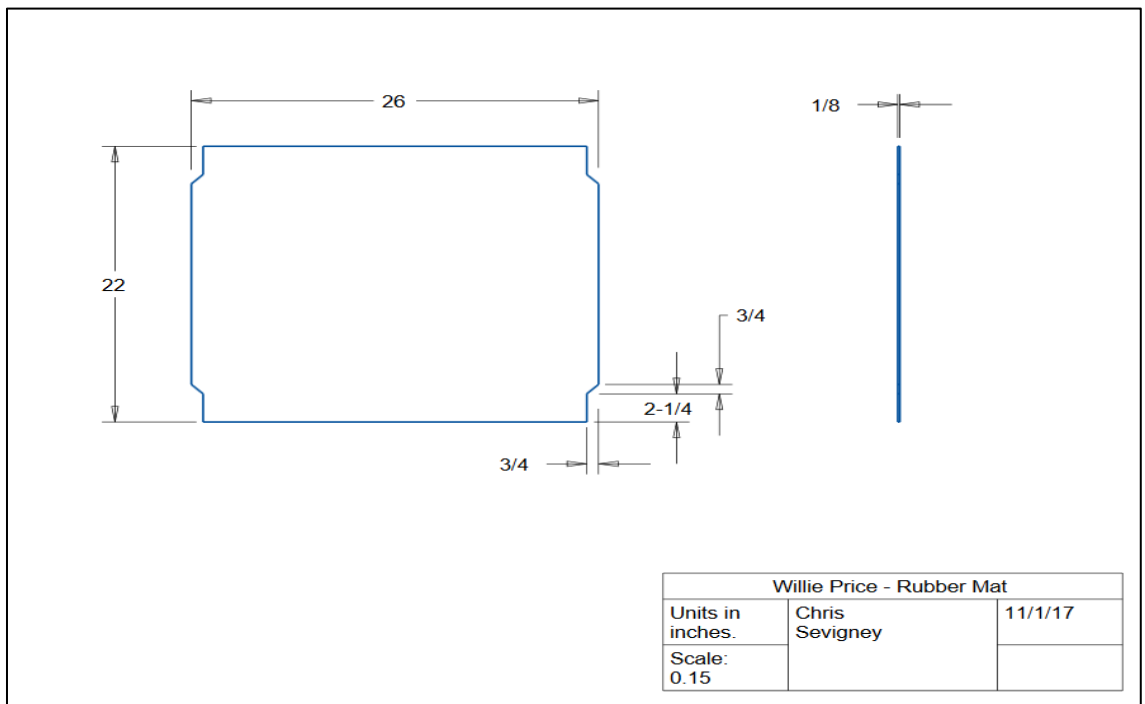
Engineering Drawing for Un-Wrapped Rubber Mat
